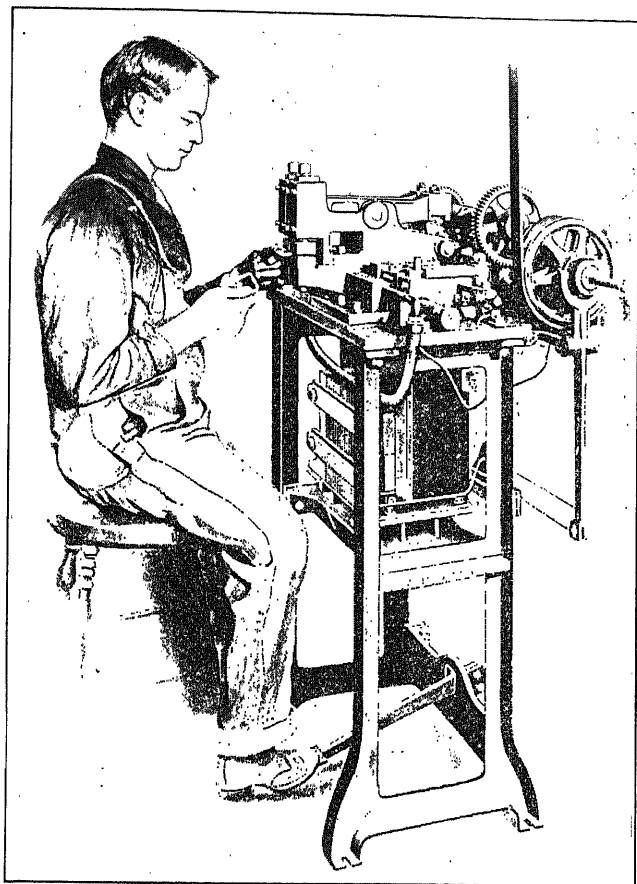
Automatic-Operated Machine Welding Harness Rings.
